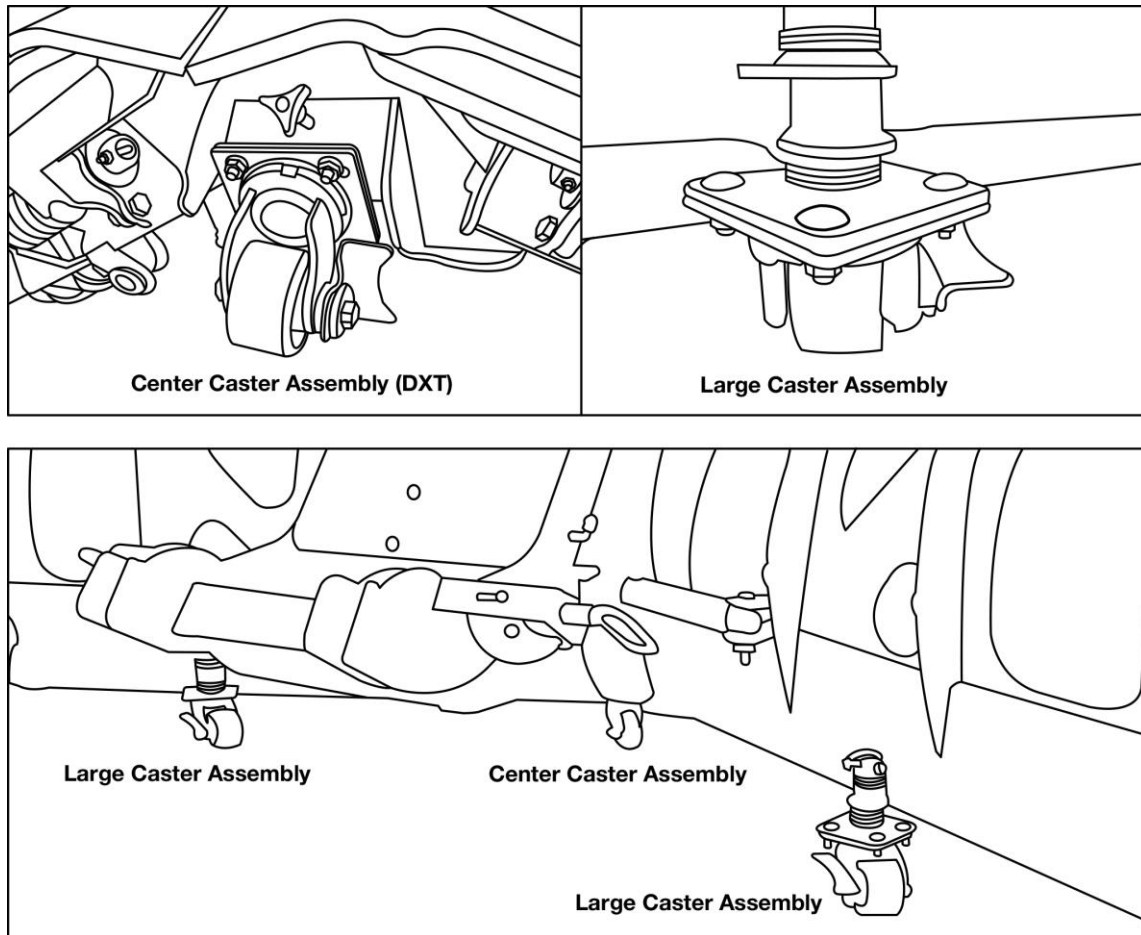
Caster Kit, DXT V-Blade Casters Shown Assembled – Note: extra hardware included
